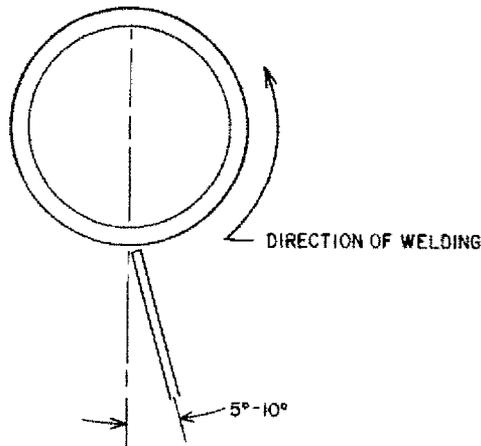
Correct electrode angle when welding the cover pass on small-diameter pipe by the uphill-welding method.
